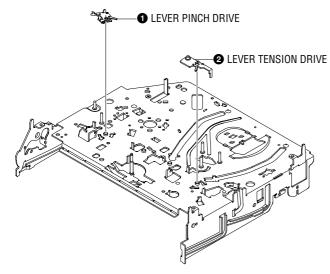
Lever Pinch Drive, Lever Tension Drive Removal
